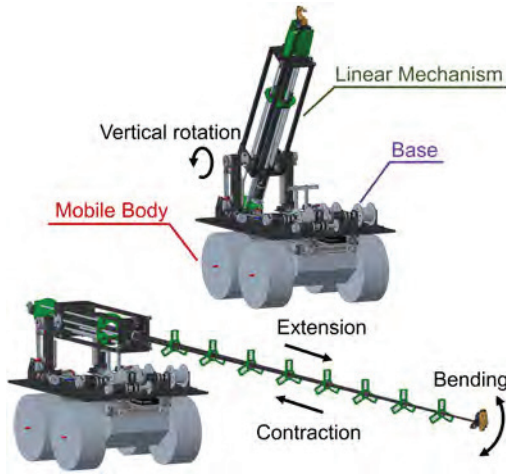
Structure of the improved prototype equipped with elastic telescopic arm
